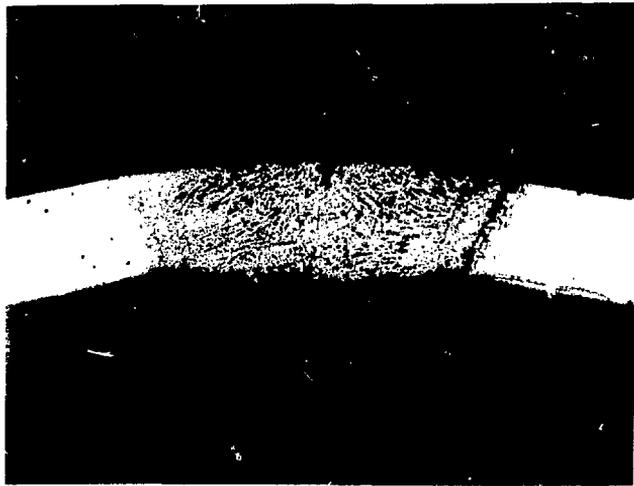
PEAKED EDGE PRESENTATION IN WELDED GERMAN MILL TUBE
